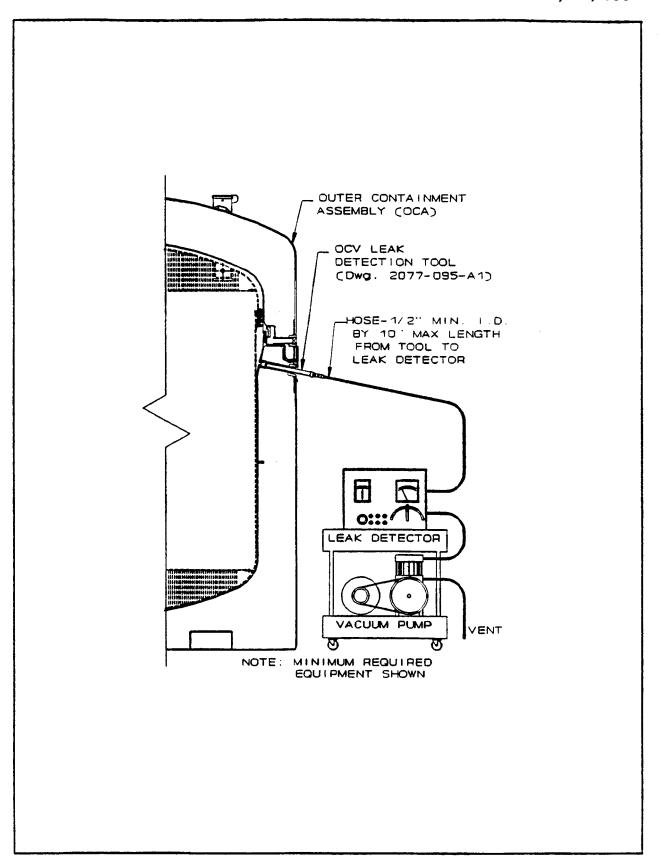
Vent Port Plug Seal Test Setup Support Arrangement for OCV
